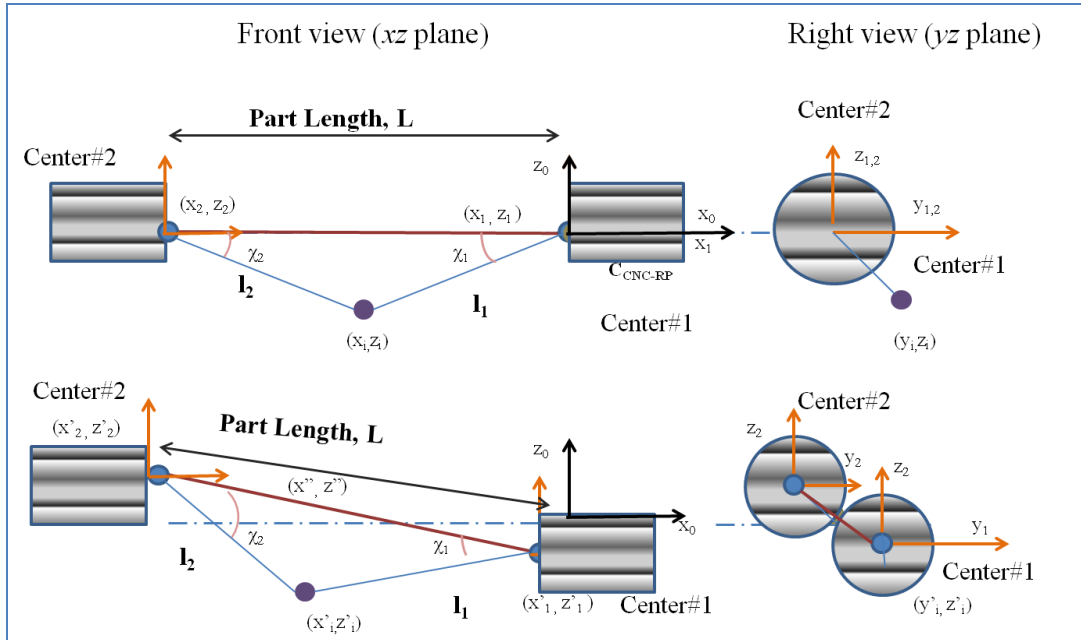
Part Coordinate System w.r.to Fixturing Deviation parts
